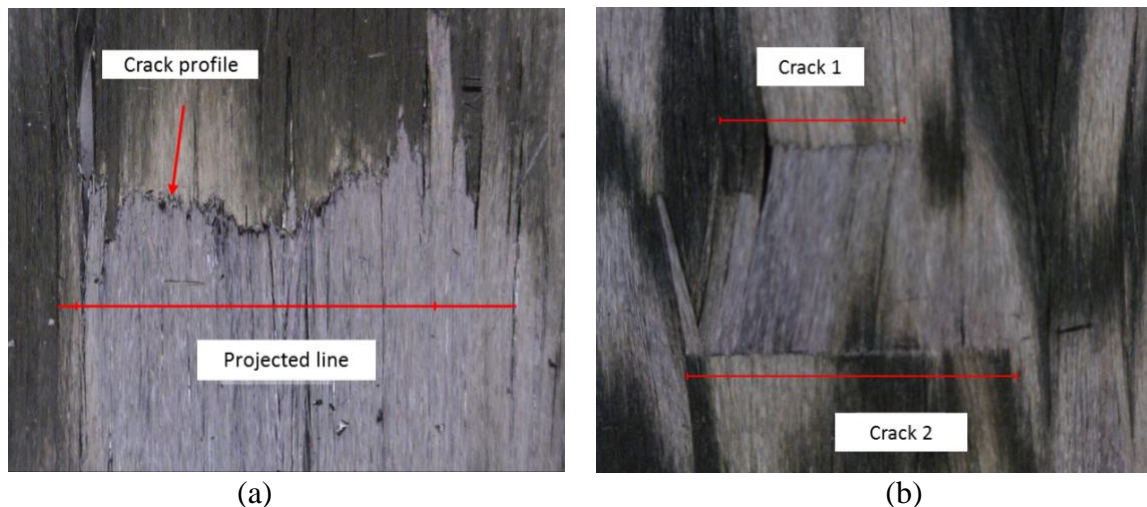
Thermal deply of impacted specimens. (a) Fiber crack and projected line. (b) Multi cracks.
